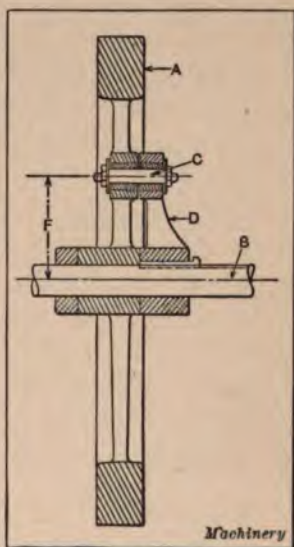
Flywheel loosely mounted on Shaft and Driven by Shear Pin
